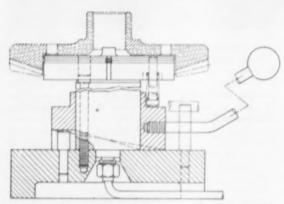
Special fixture for the rapid checking of a shallow recessed bore
